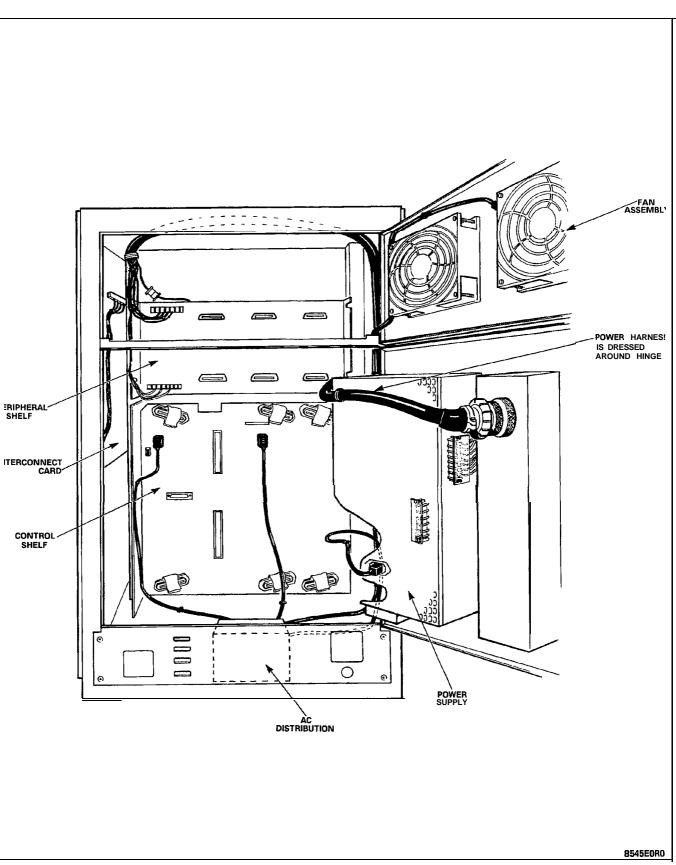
Rear View of SX-ZOO Universal Control Cabinet – Power
